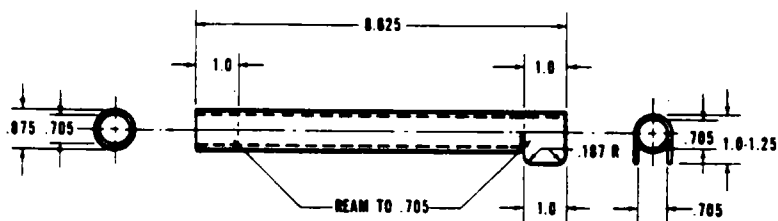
Fabricated Rudder Trim Tab Rigging Tool
